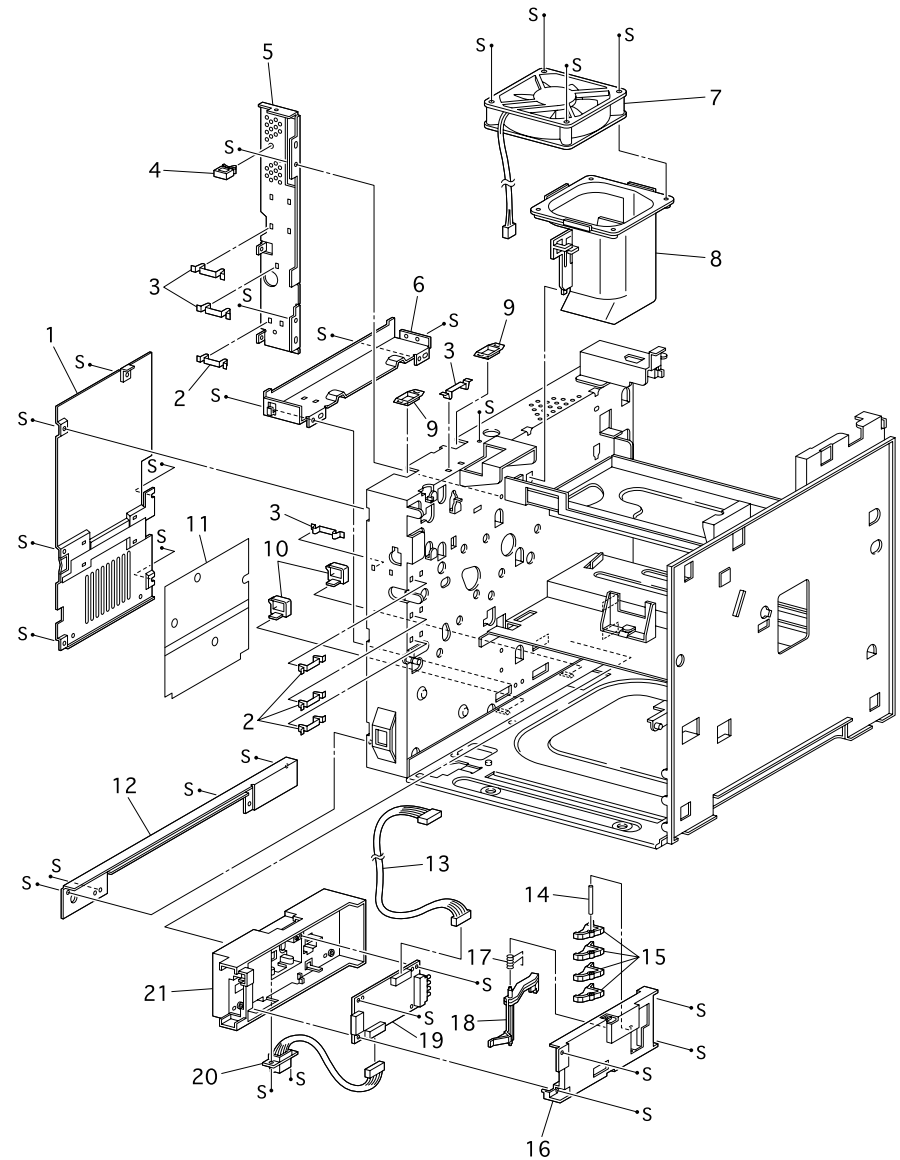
Exploded Diagram for Frame & Size Sensor
